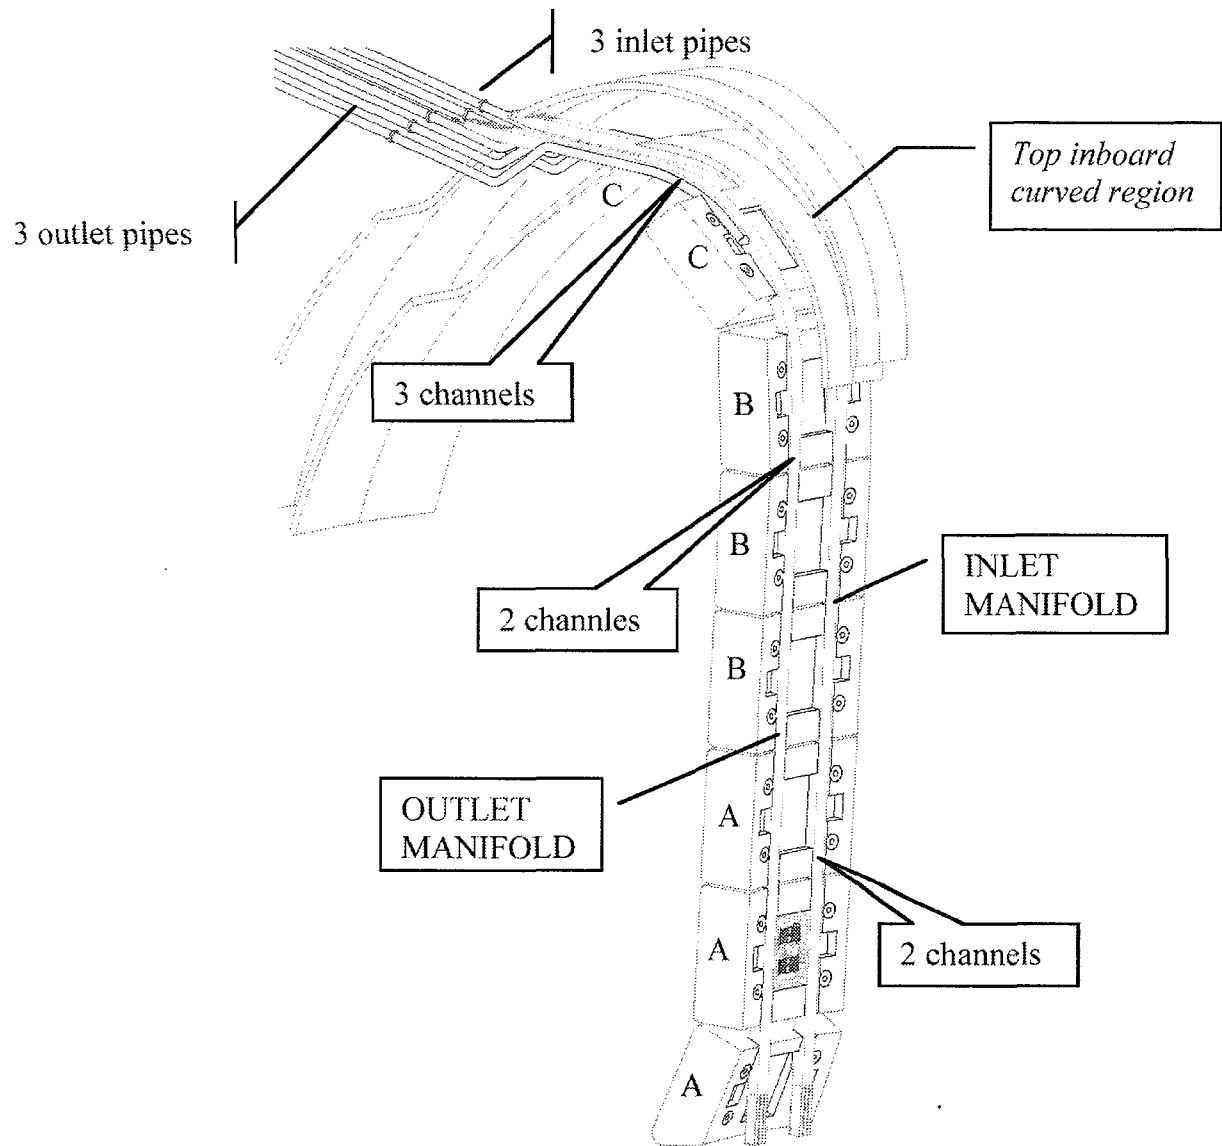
1 – Cooling manifolds for inboard blanket, typical 20° sector.
